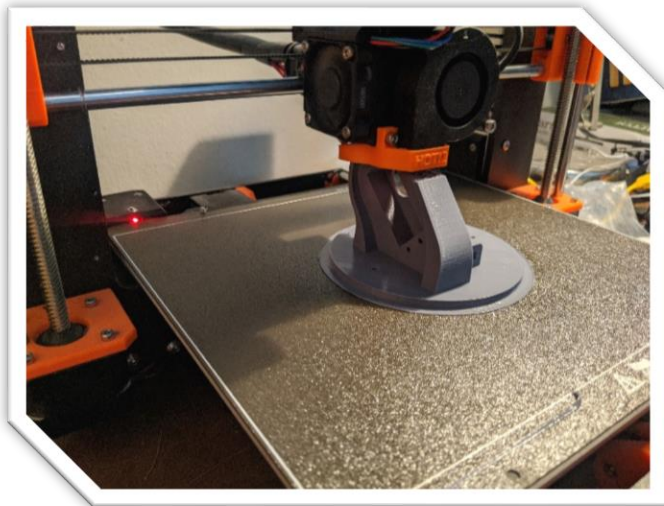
Shoulder mount for upper platform being printed on Prusa Mk3 3D home printer.
